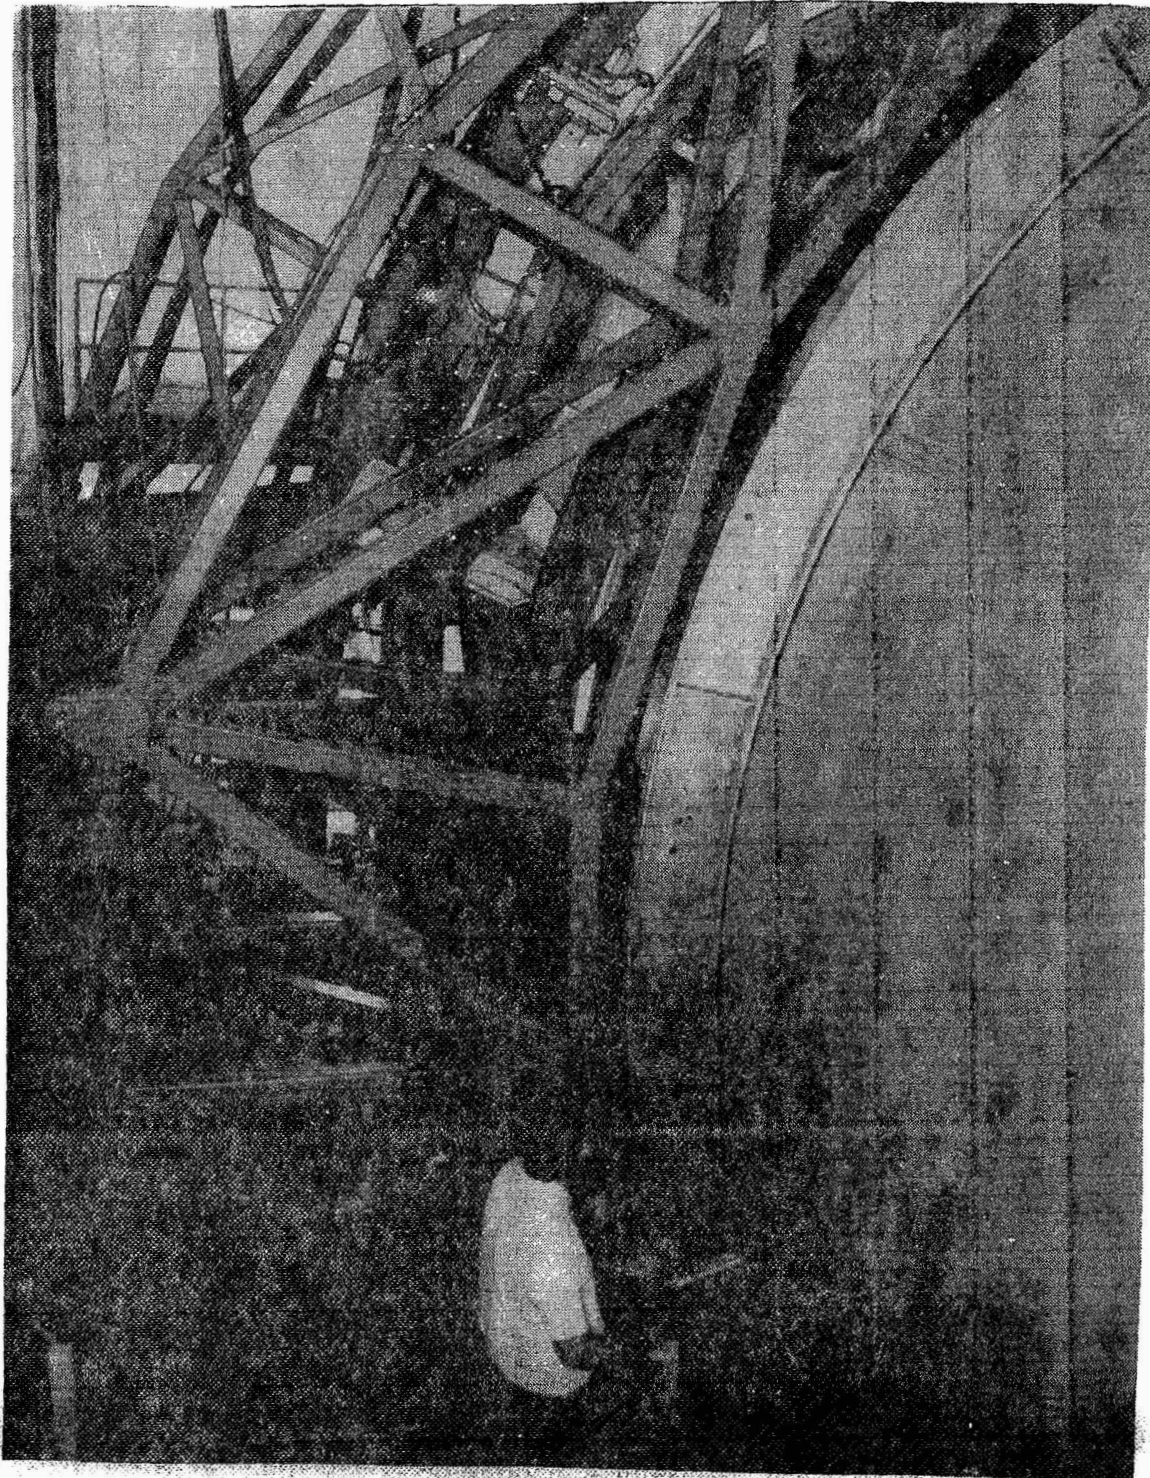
Fixture for welding of Space Shuttle External Tank.
